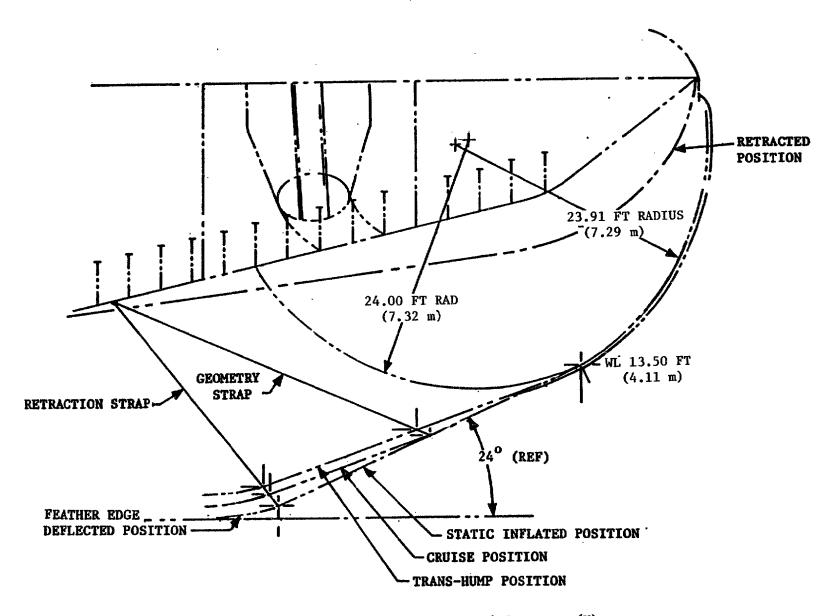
(U): Advanced Planing Bow Seal Geometry (U)
